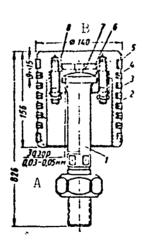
Piston of the second stage: 1) piston rod; 2) piston of the second stage; 3) piston ring; 4) expander ring; 5) guide ring; 6) washer; 7) pin; 8) cap. A) Space 0.03-0.05 mm; B) diameter.
